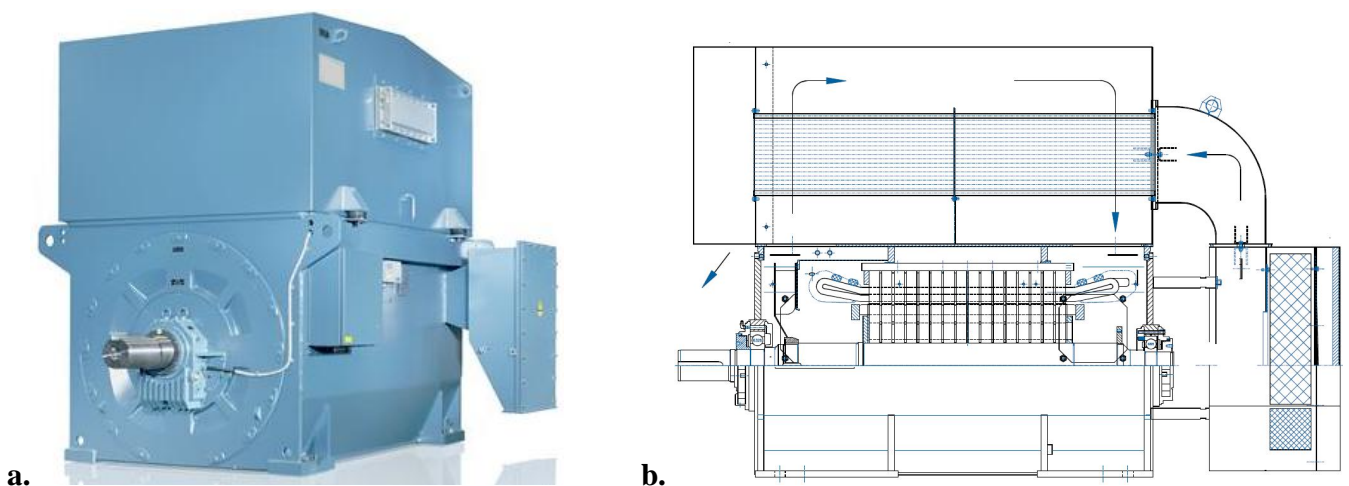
a) Modular Induction Motor with Journal Bearings and Heat Exchanger, b) Typical Cross-Section of a Totally Enclosed Air to Air Cooled (TEAAC) Motor.
